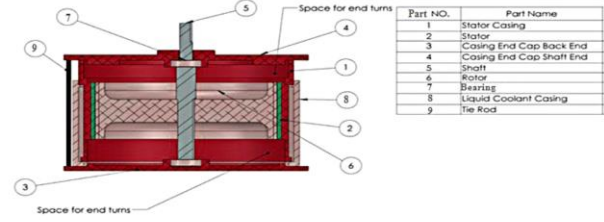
Cross section of Brushless DC motor with Permanent Magnet
